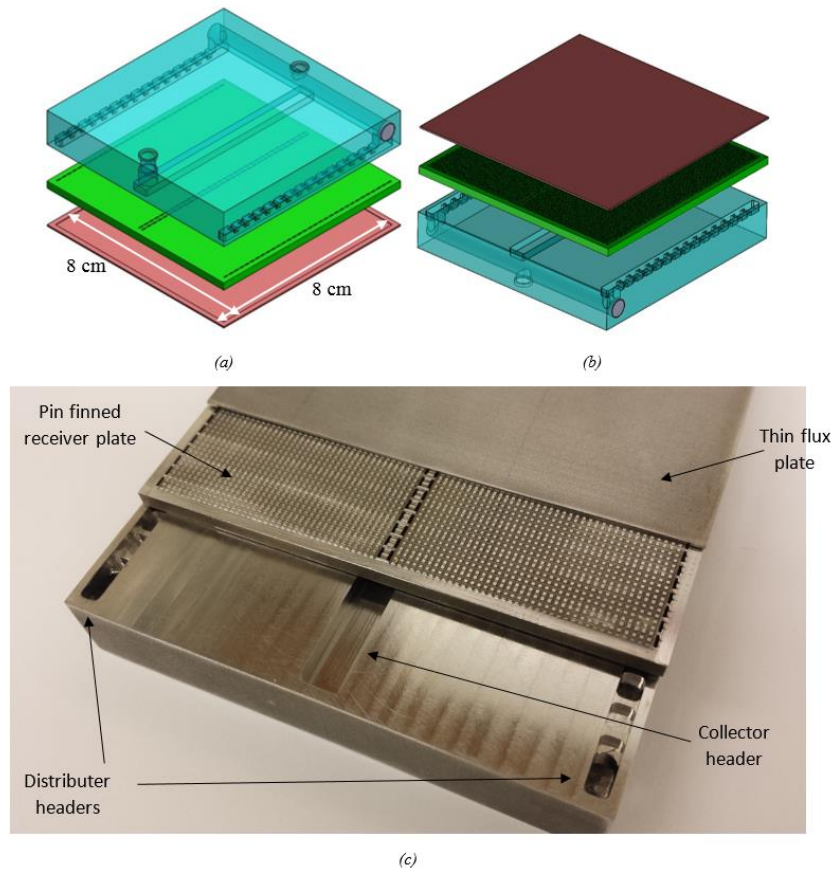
(a and b) Exploded view of the finalized design from top and bottom (c) The laminates of the fabricated test section
